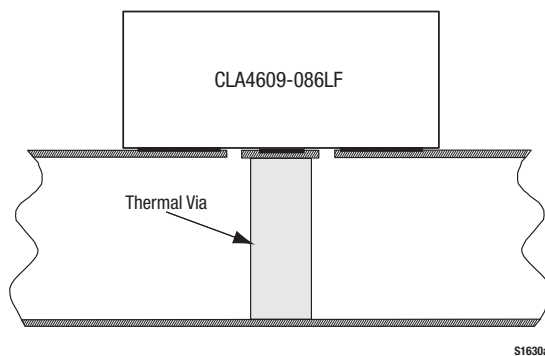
Cross-Section View of Suggested Printed Circuit Board
